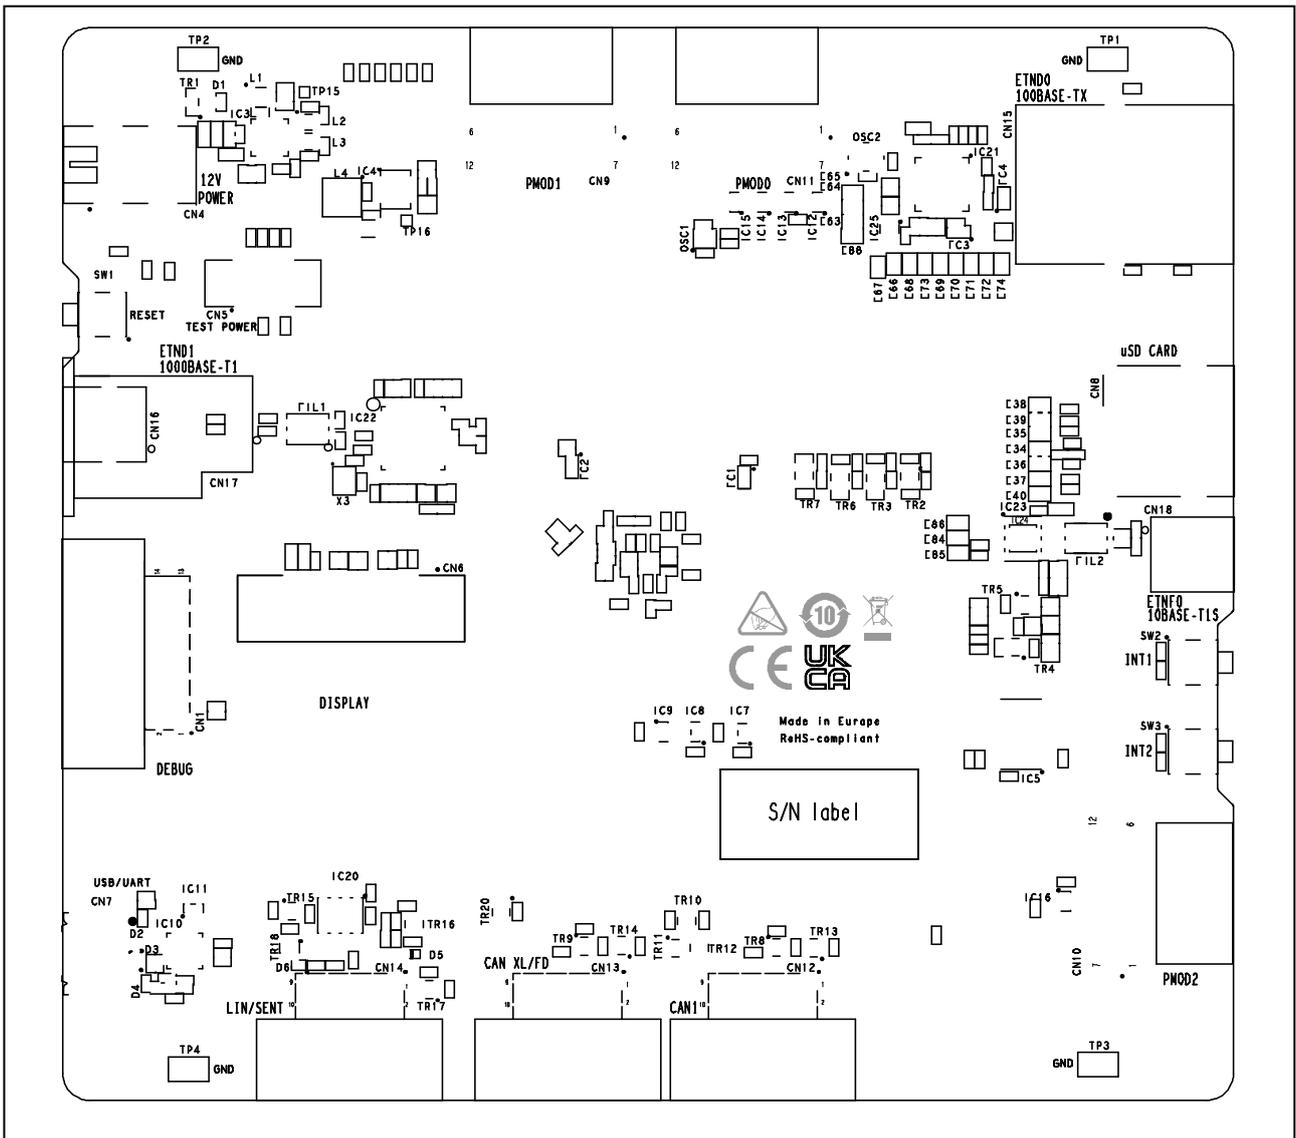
Placement of connectors on bottom side of the starter kit for board version D020925_06_V0100
